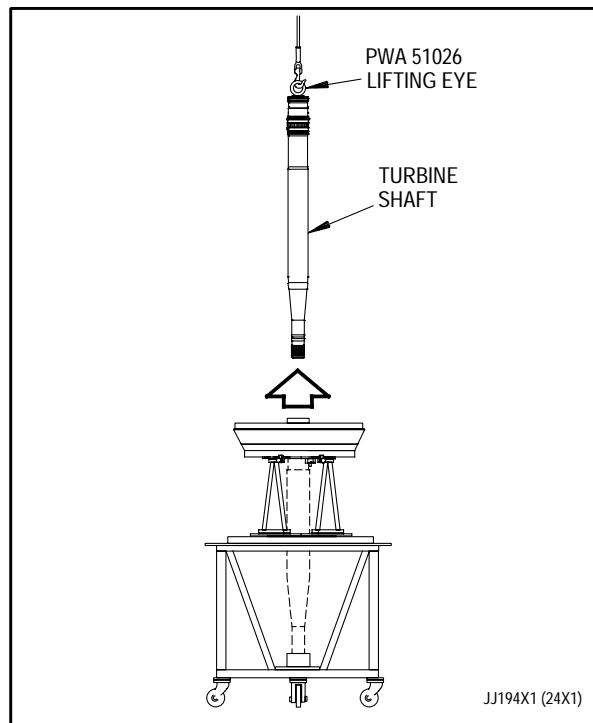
Front Compressor Drive Turbine Shaft - Removal (Sheet 1 of 3)
